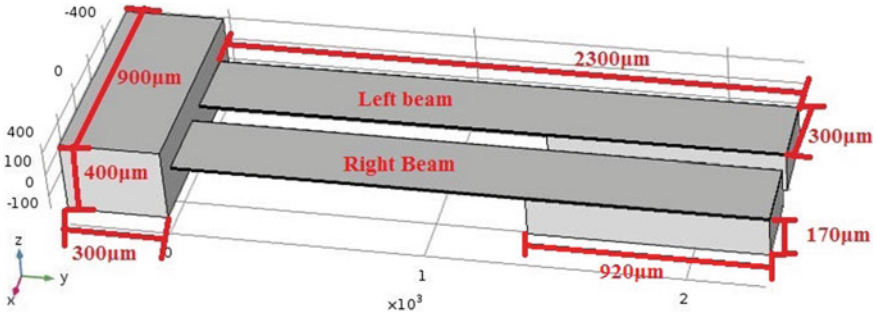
Dimensional view of the pi-shaped cantilever beam
